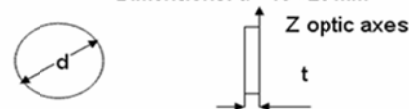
Axial plates. Dimensions $d=10-50$ mm, $t=2-8$ mm
